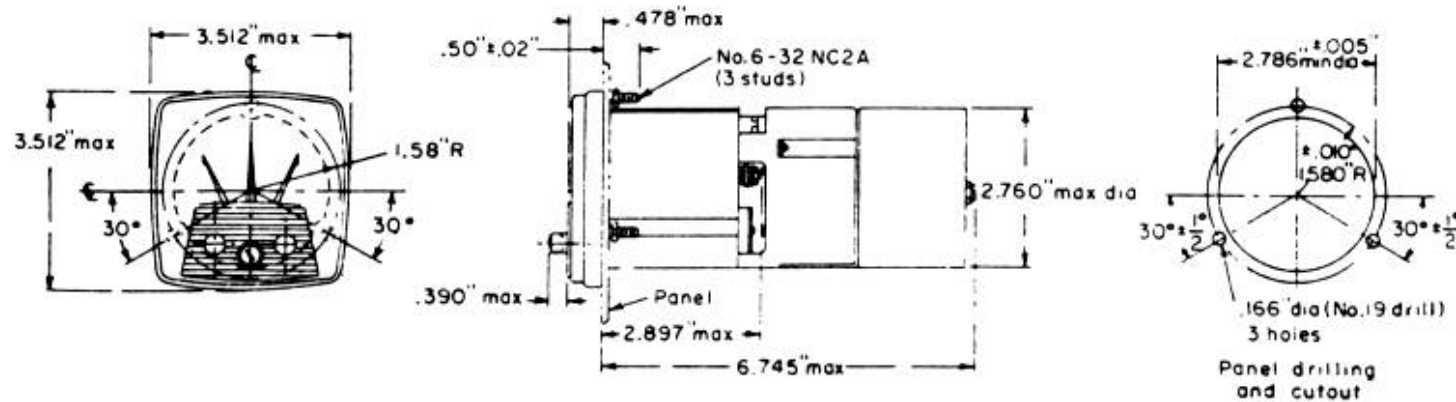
195 Series Meter Relay, 3 1/2-inc, with control unit rear mounted
